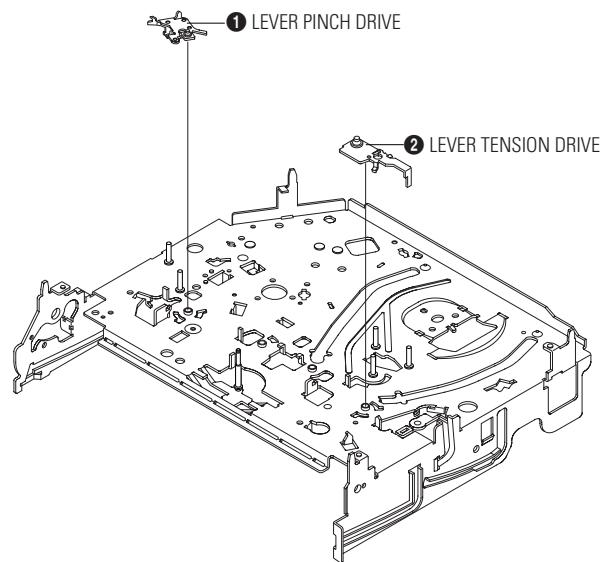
Lever Pinch Drive, Lever Tension Drive Removal
